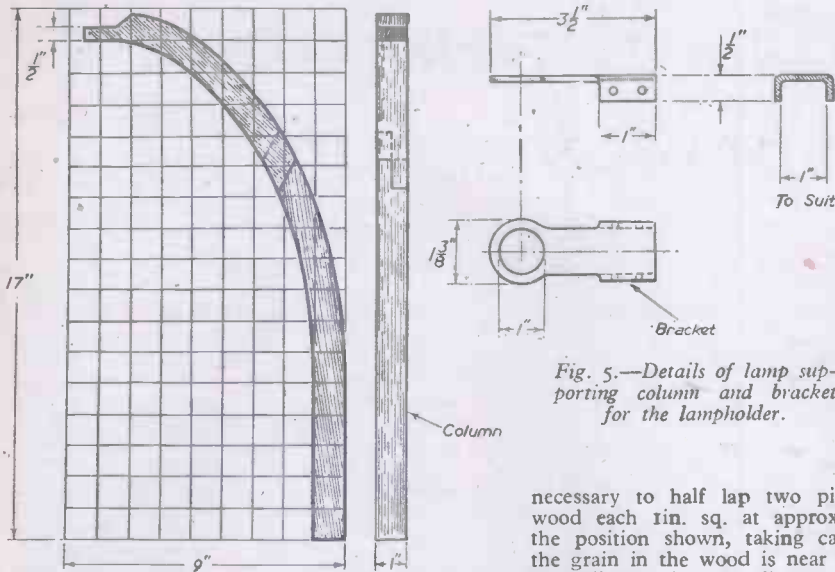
Details of lamp supporting column and bracket for the lampholder.
